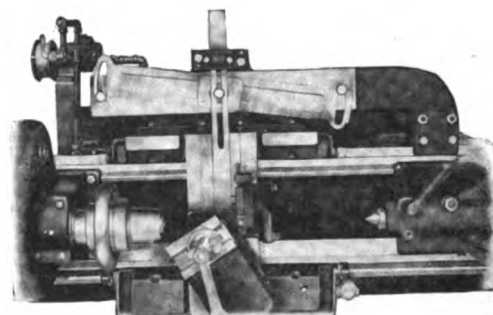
Taper Attachment Used on Sidney Medium Pattern Lathes
